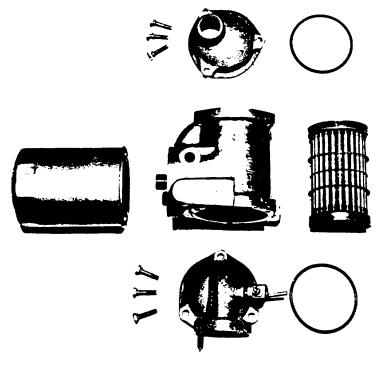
Exploded View of Lubricating Oil Cooler and Filter. (lowllne engines)
